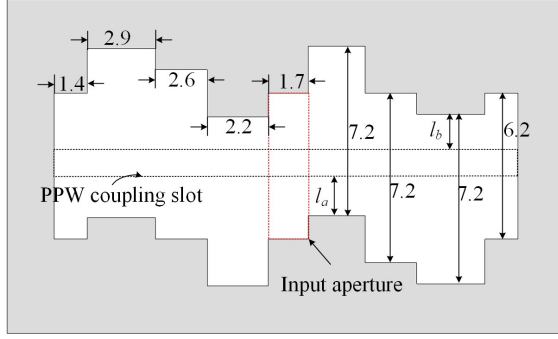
Dimensions of the LSG unit. All dimensions are given in millimeters.
